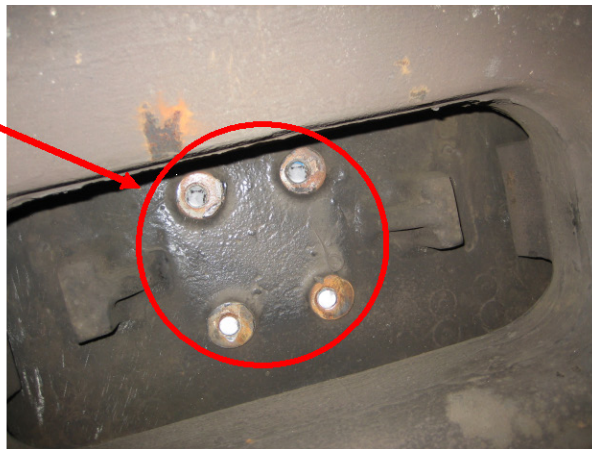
shows sidewall deformation near the gooseneck region of the underframe. Both ends of the car showed similar damage, on opposite sides. On the leading end, the sidewall damage appeared to be associated with a bubble-shaped deformation in the bottom plate of the draft sill, however, the bubble appeared to be shallow. It was not possible to measure the flatness of this plate with the truck in place to confirm the presence of a bubble. On the left side of the leading end, the bolts to the drag link attachment to the carbody were also broken. The failure of these bolts was similar to the failure seen on the trailing truck of the first car. Similar failures have also been observed in an impact test of similar equipment [1].
